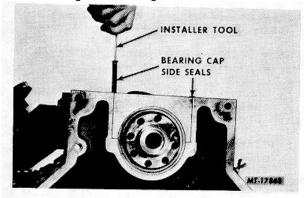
Installing Rear Main Bearing Cap Side Oil Seals
